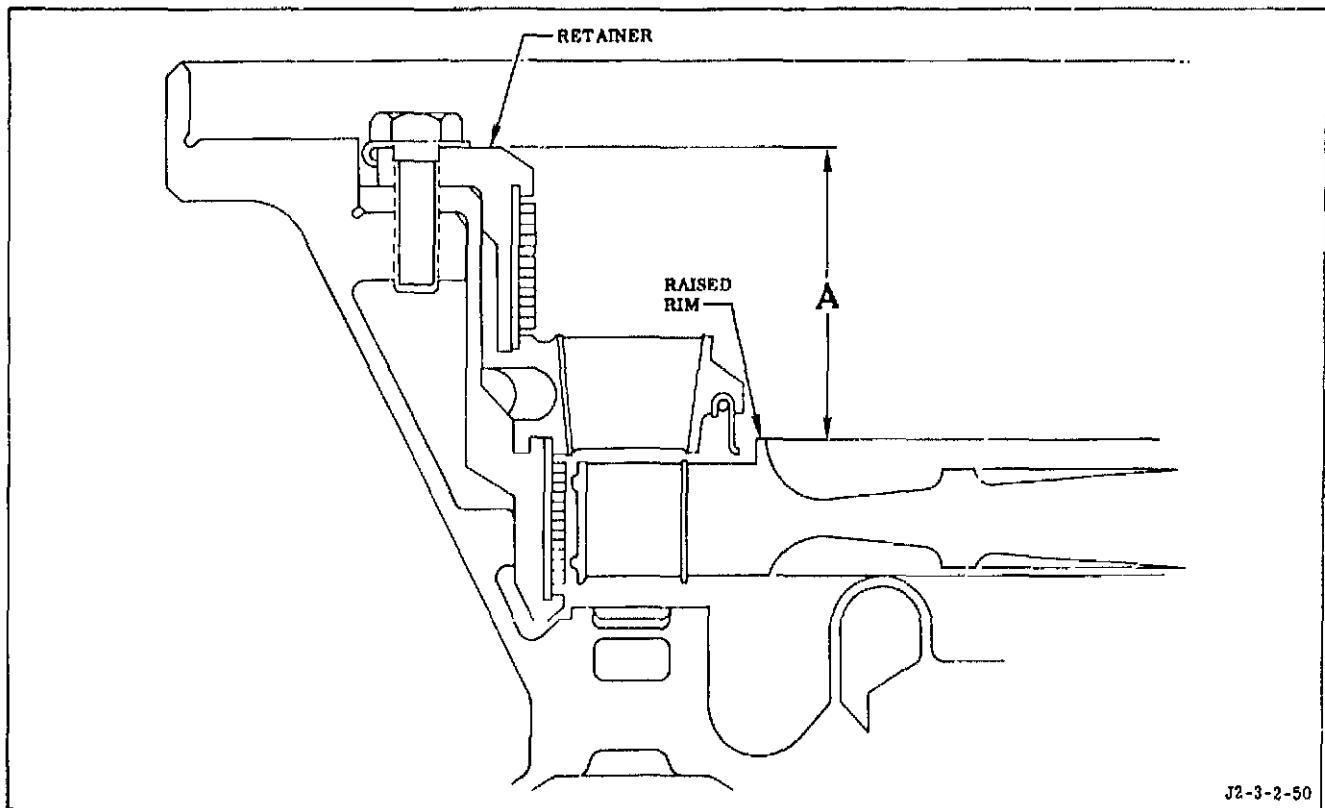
Determining Measurement from Stator Assembly Flange to Raised Rim on First-Stage Turbine Wheel
